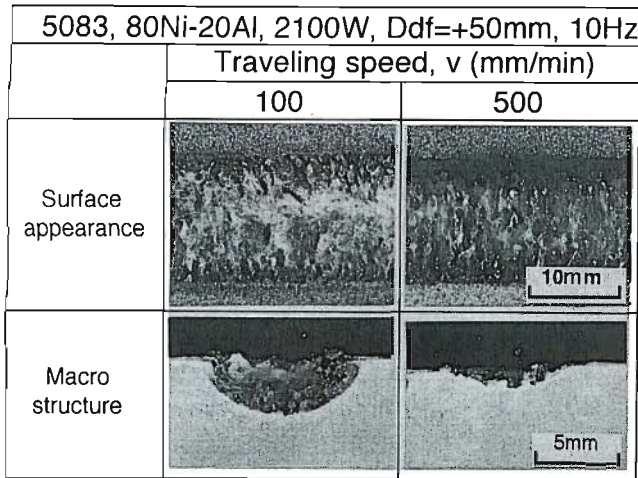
Surface appearance and macrostructure of the laser alloyed layer.
